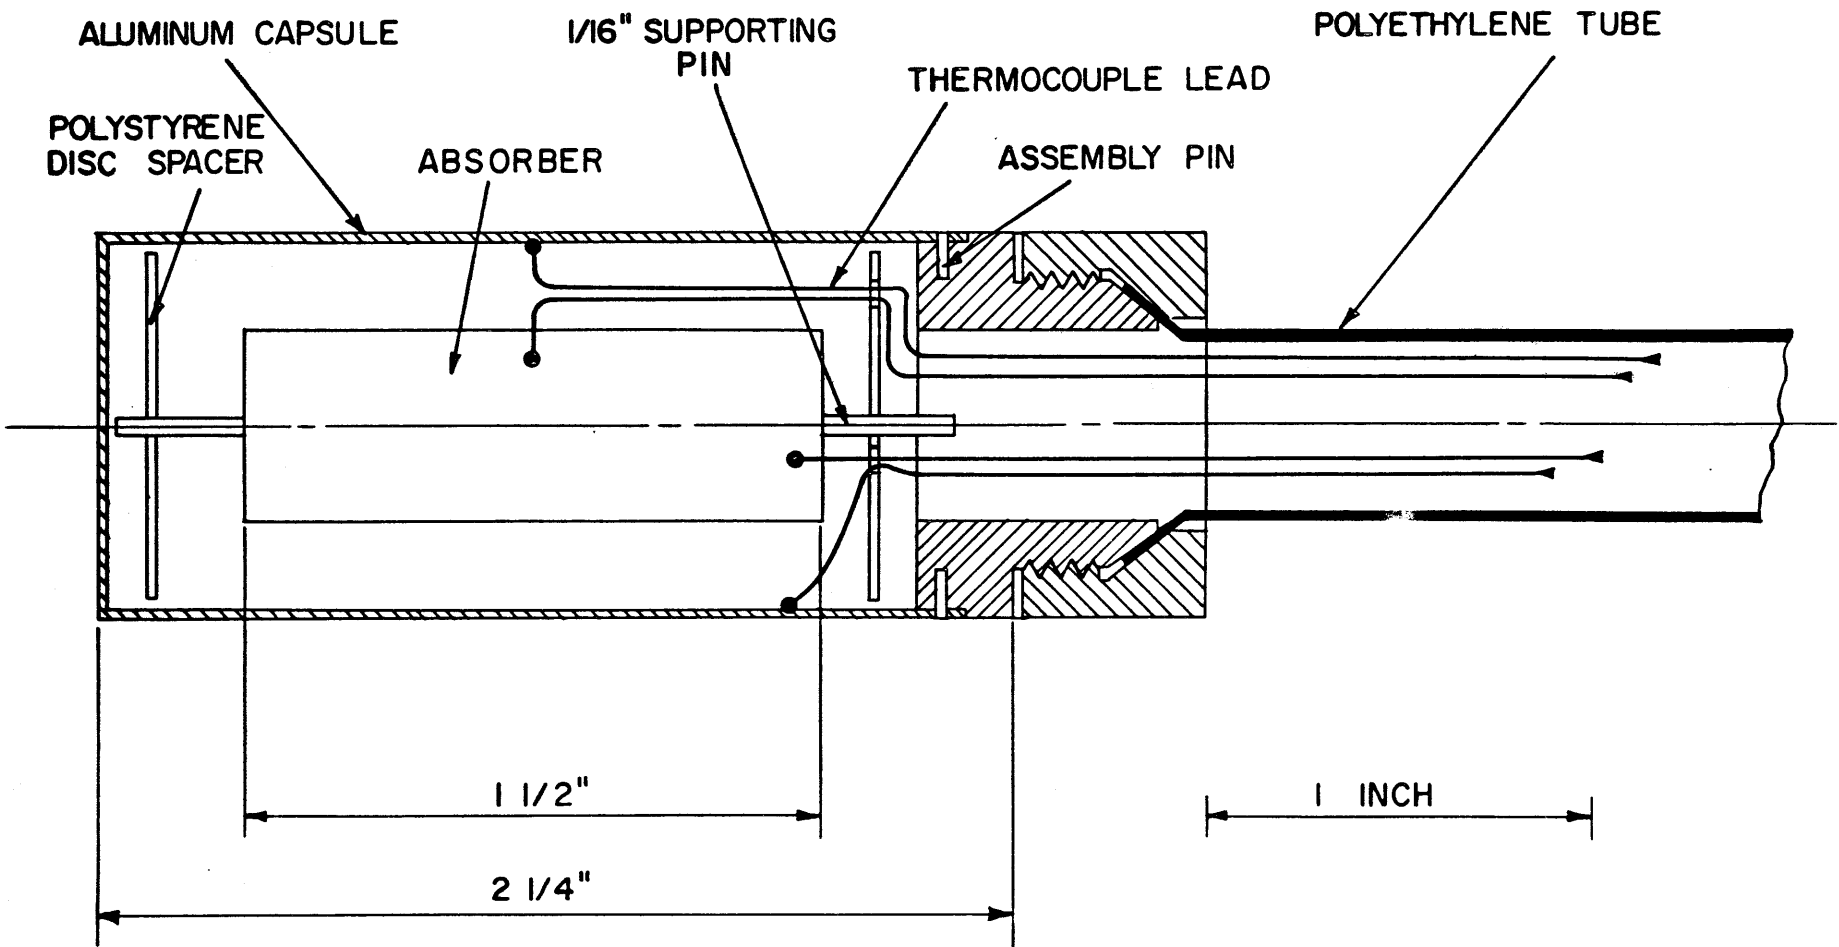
ASSEMBLY DRAWING OF A SERIES IV CALORIMETER
